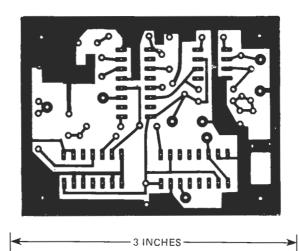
FULL-SIZE foil pattern for frequency multiplier can be used for making your own PC board.
